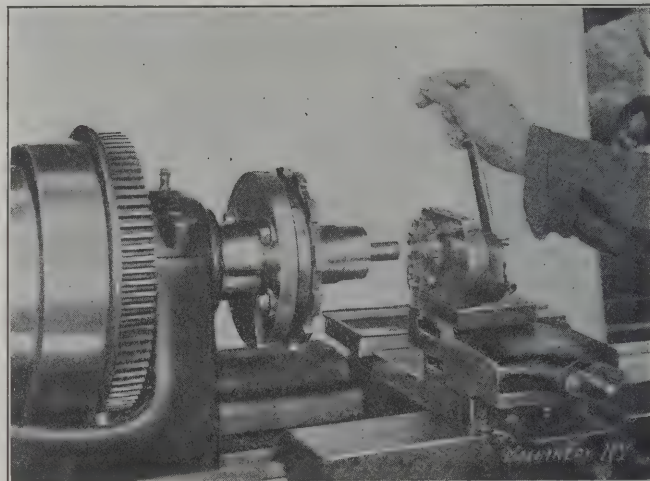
Threading the Gear Case Covers with a Rivett-Dock Threading Tool
